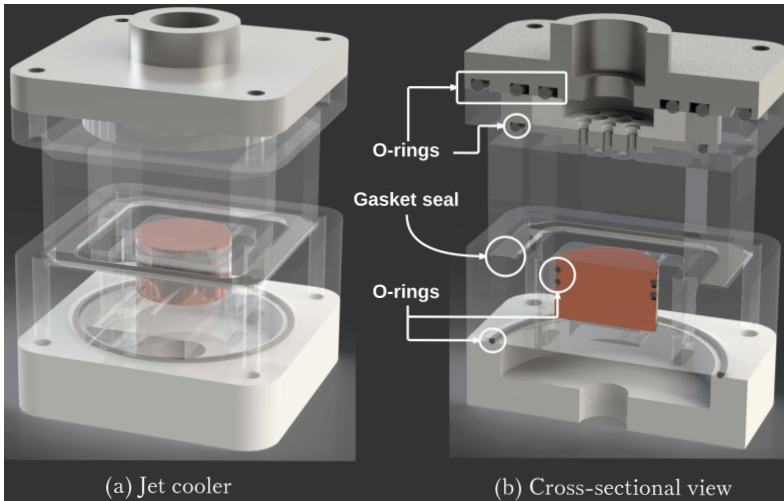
CAD renderings of the two-phase jet cooler: (a) final assembly and (b) cross-sectional view showing the sealing design details.
